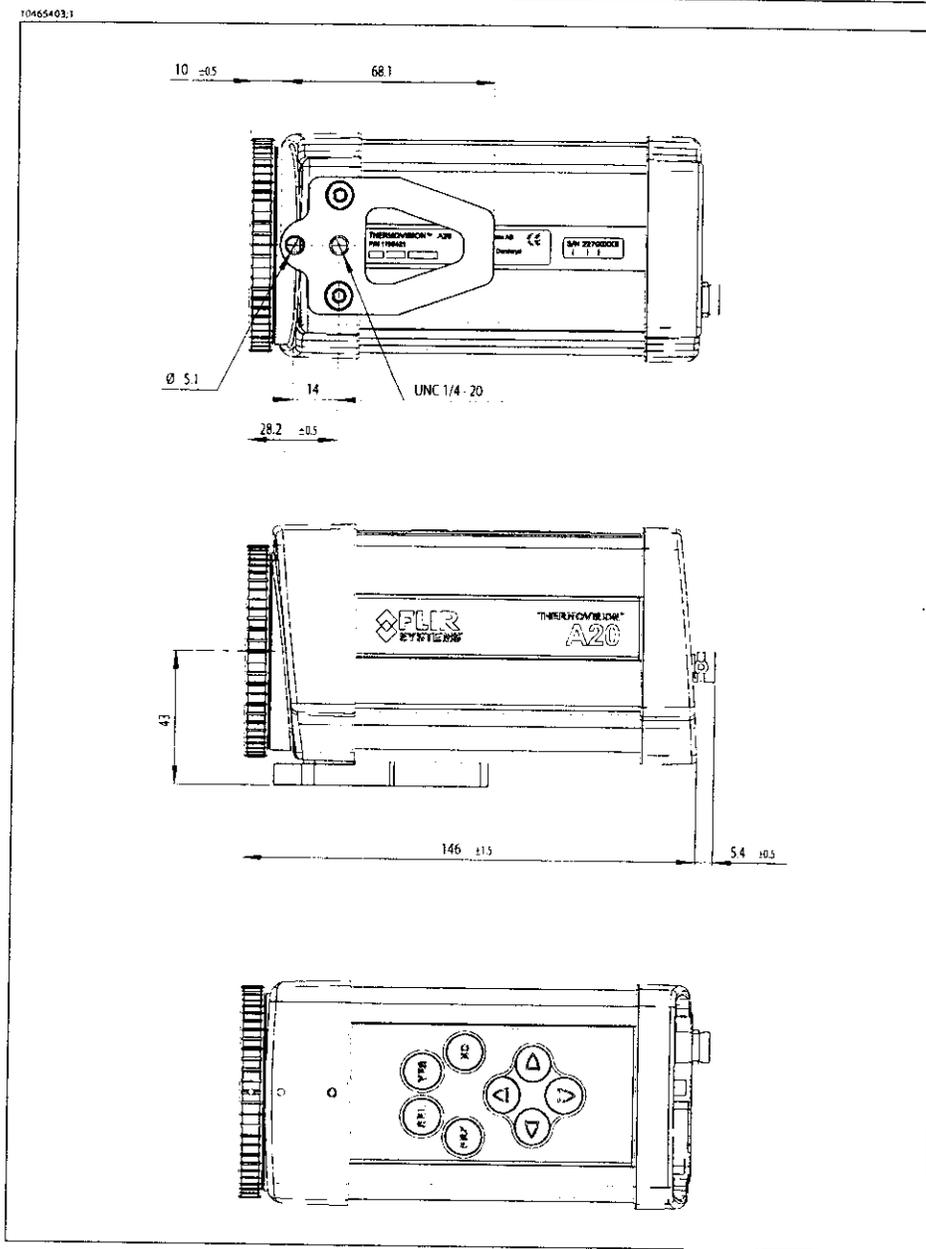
Overall dimensions of the camera, without lens – bottom & side view
